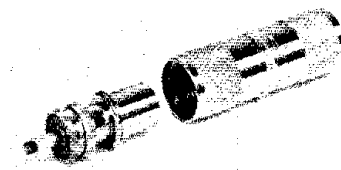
An elongated PL-259 can be made by soldering the sleeve portions of two connectors together as shown above. The elongated sleeve enables the operator to obtain better leverage when installing or removing a coaxial cable.
